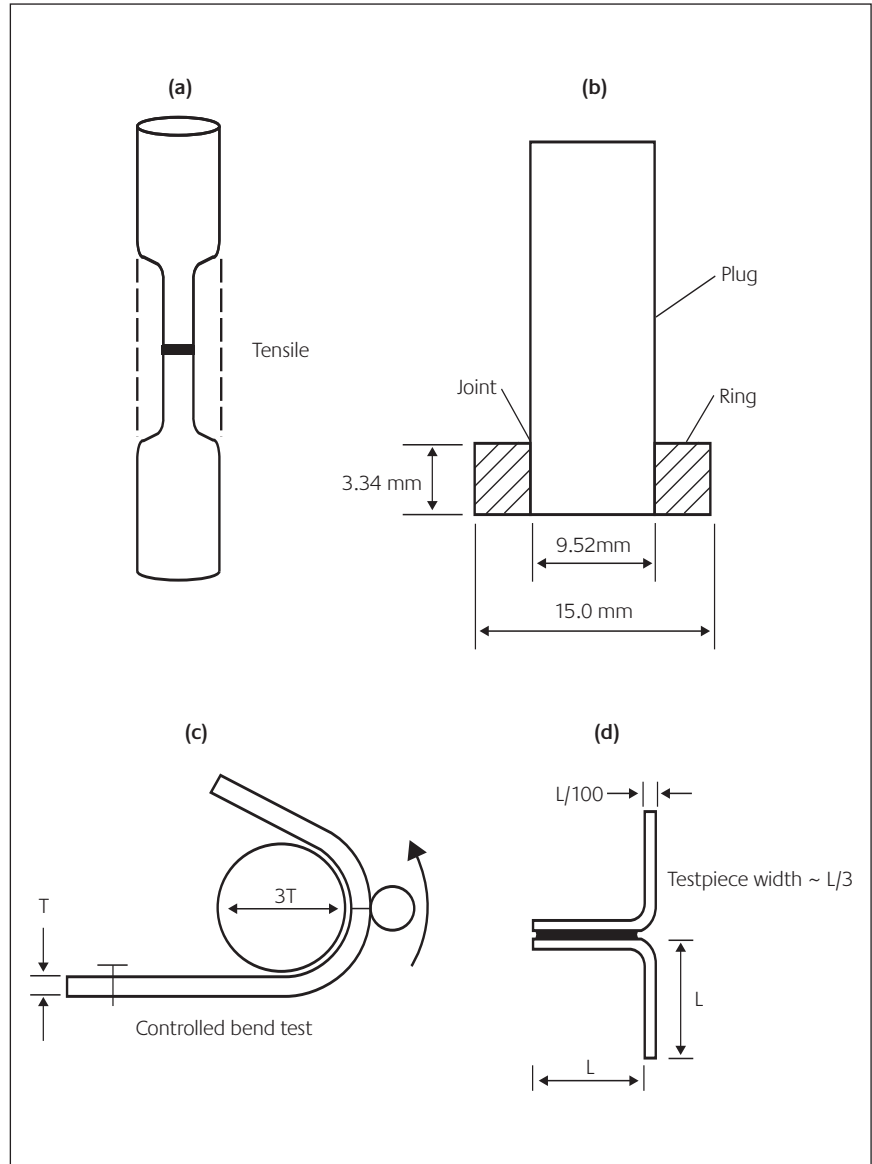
Testpiece configurations: (a) Tensile test on a butt joint (b) Ring and plug for test in shear (c) Controlled bend test (d) Peel test
